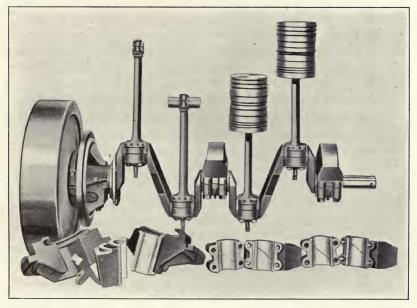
Connecting Rod, Piston Pin Crank Shaft, Flywheel and Main Bearings of a Four Cylinder Engine.
